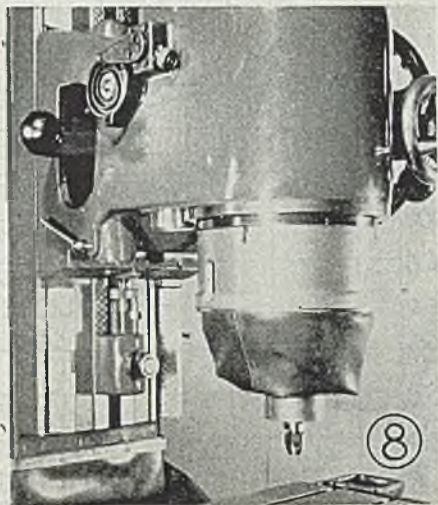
Depth setting provisions for jig grinder head. Micrometer stop assures accurate repeat settings of main spindle housing. Positive adjustable stop on pinion shaft determines grinding depth. Angular limiting screw, left center, provides small increments of adjustment. If pinion shaft is given more than one full turn in raising, scroll lifts screw clear, allowing full travel
